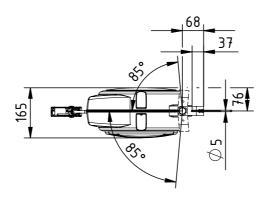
Assembly of the aluminum cable rewinder 601KR/DW 601KR/EW
